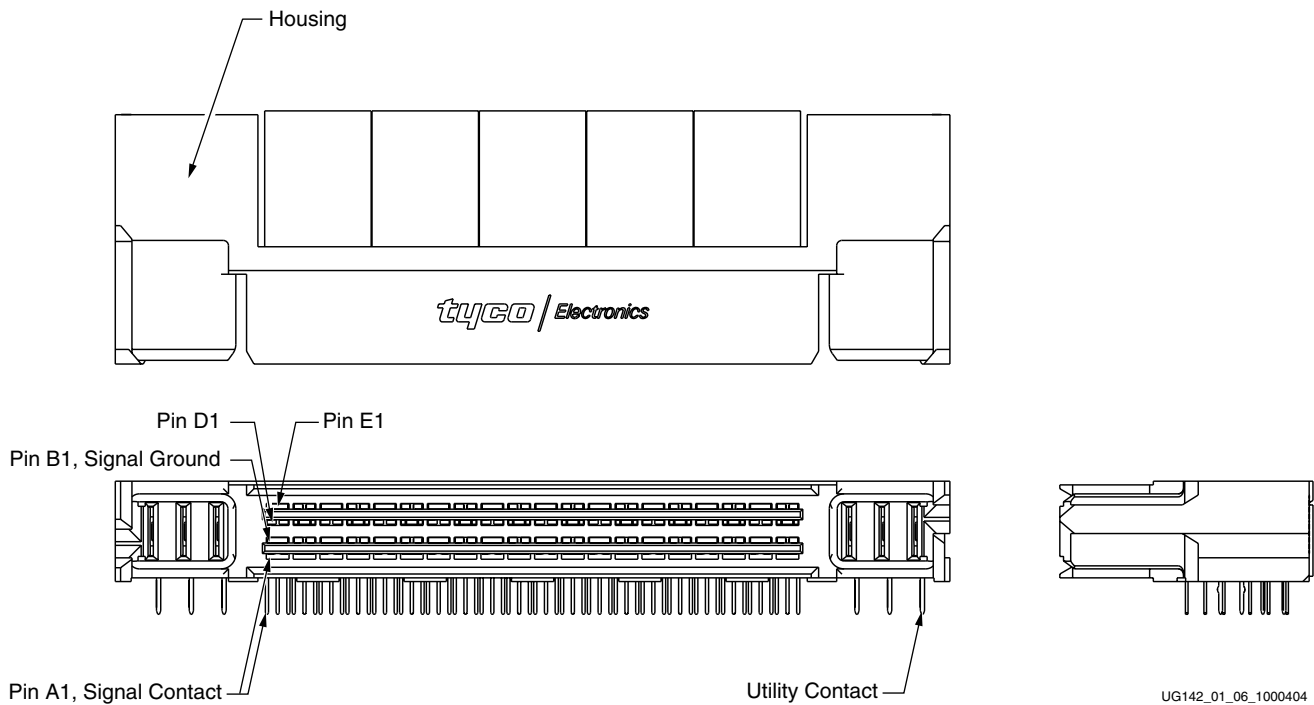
Z-Dok+ Host Board Connector, Mechanical Drawing
